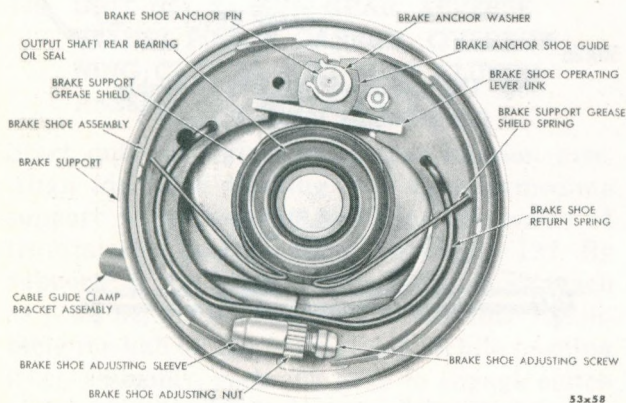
Internal Expanding Handbrake (Drum Removed)
